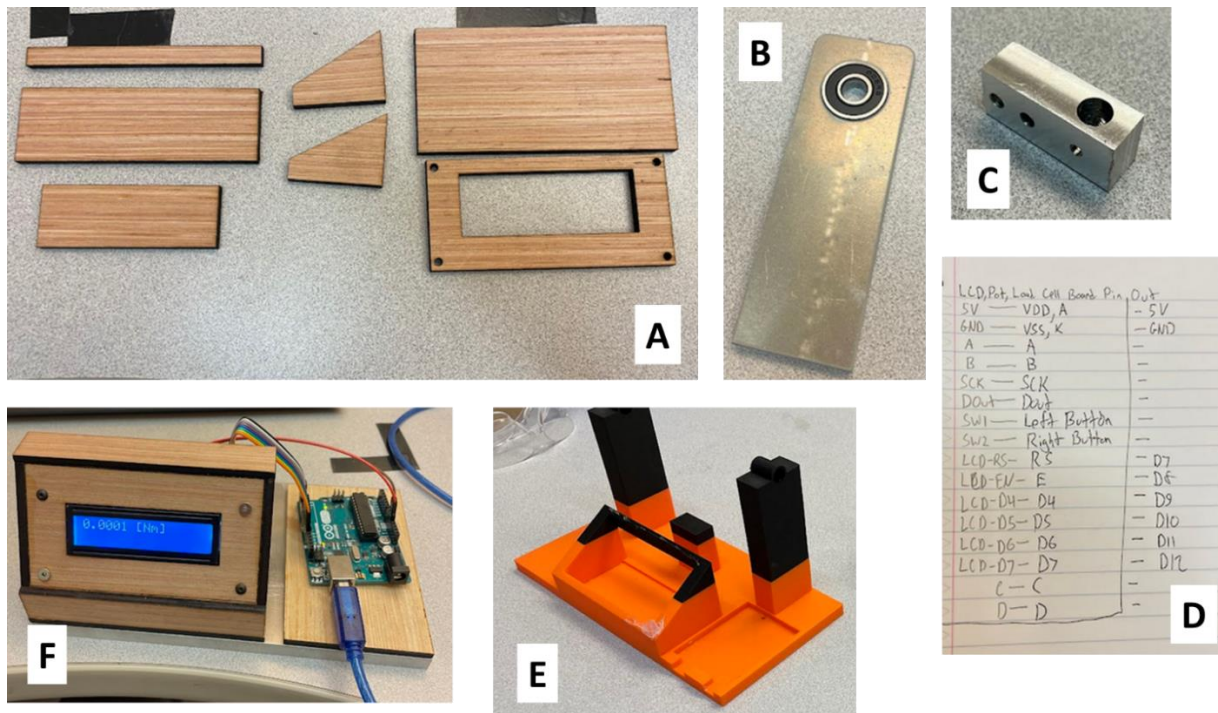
Skills involved A-Laser cutting, B-Press fitting, C-Machining, D-Basic electronics, E – 3D printing, F- Microcontroller programming and Assembly.
